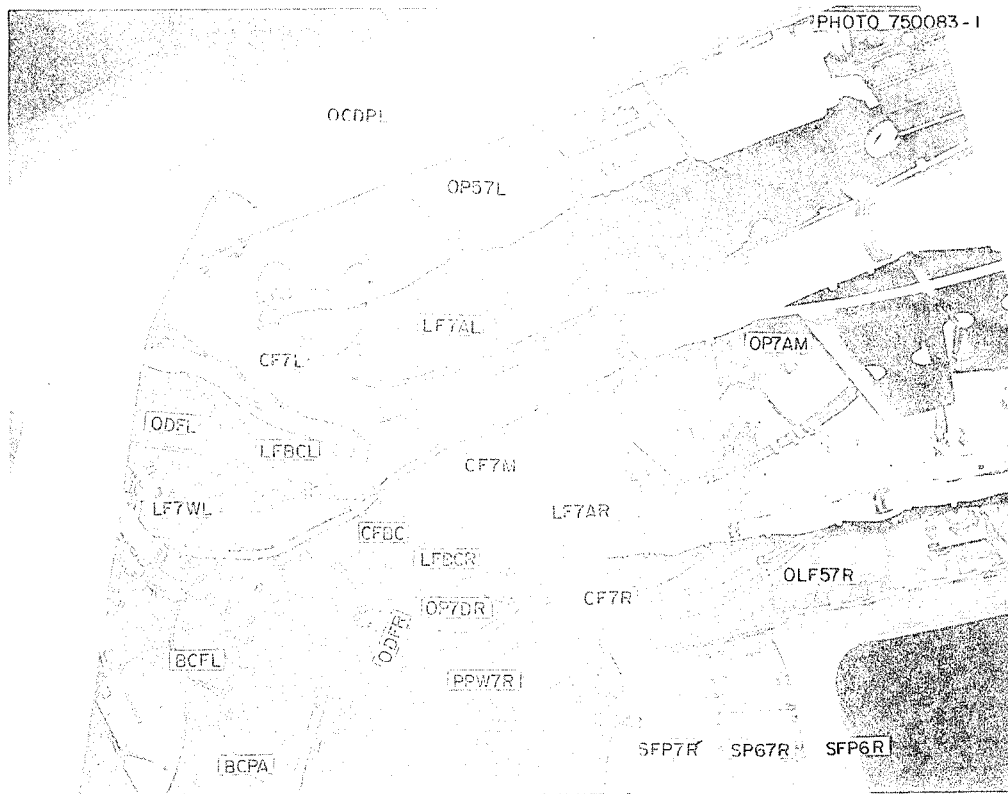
Photograph of ACAP Ceiling Structure - Forward Cabin
